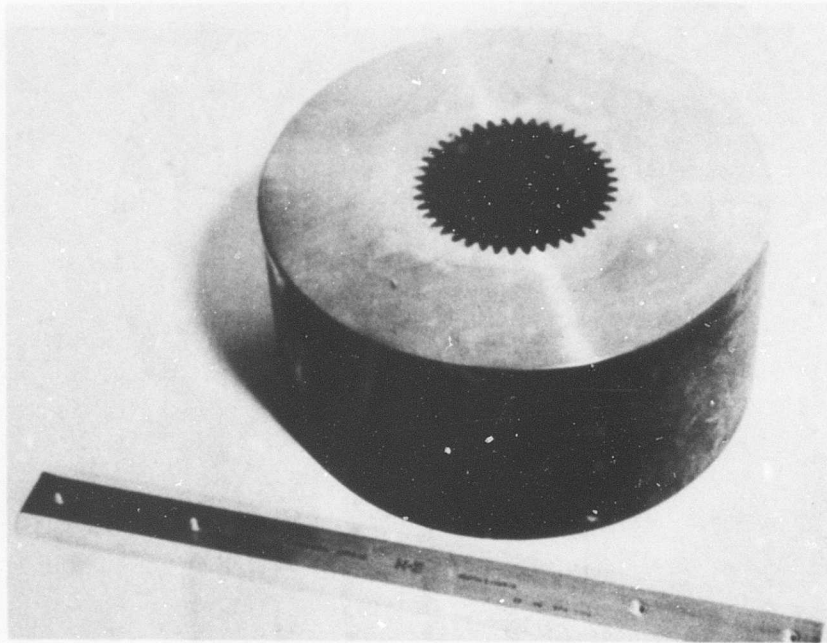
Bottom Die Used in Forging 3-Inch Gears with Integral Teeth.
